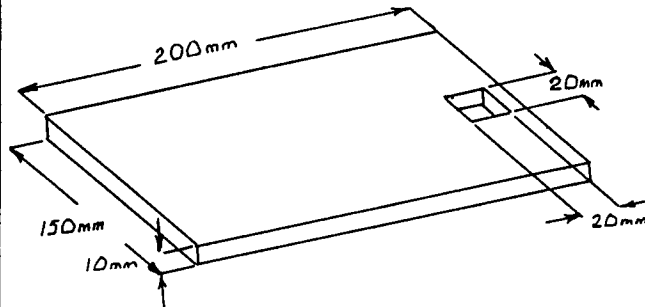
Construct a base as shown in Fig. 1. Using the drill and a small chisel cut out the hole for the support.
